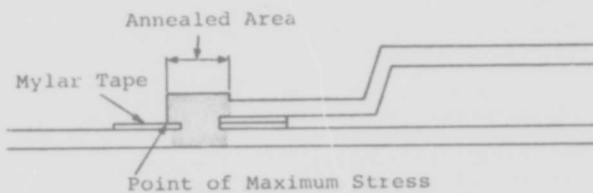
Weld profile showing maximum stress point outside annealed area of weld
